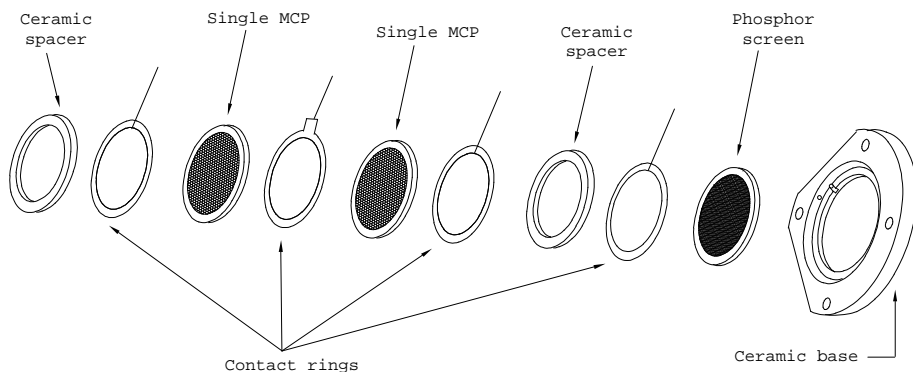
Exploded view of the BOS-40 chevron type MCP and phosphor assembly.
